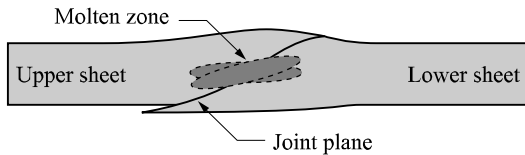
Cross-section of a mash welded joint
